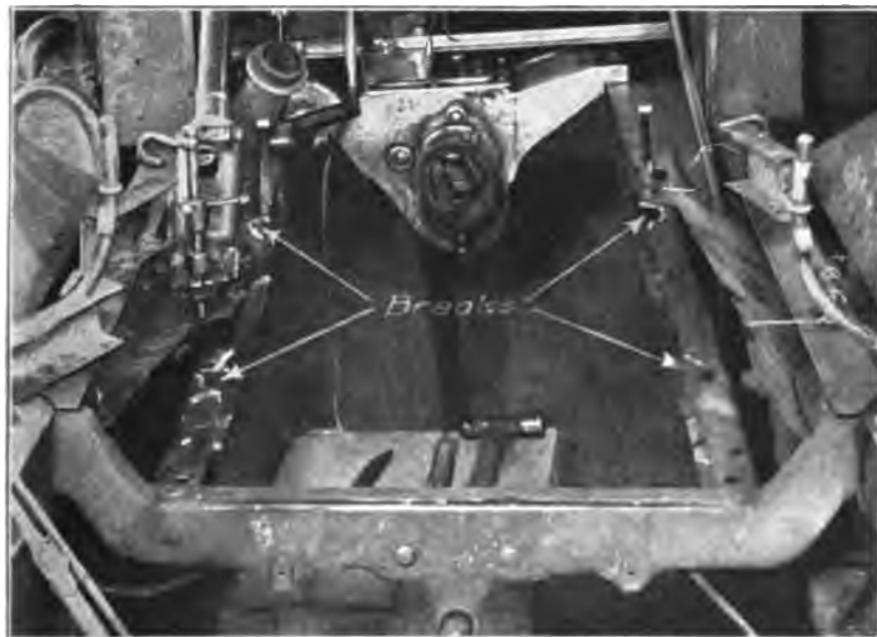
Broken Touring Car Chassis Ready for Welds
